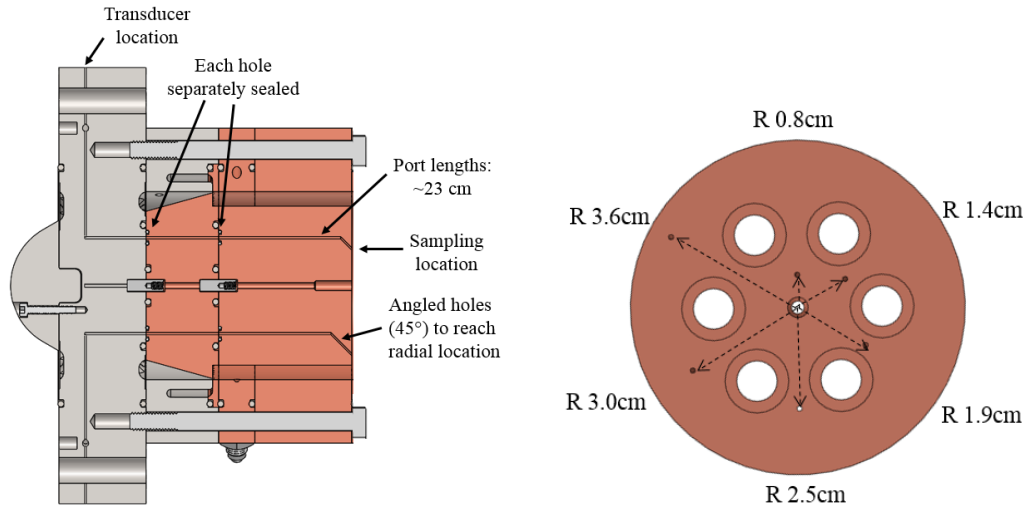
Cut-away and front views of nozzleless configuration with pressure ports on base surface.
